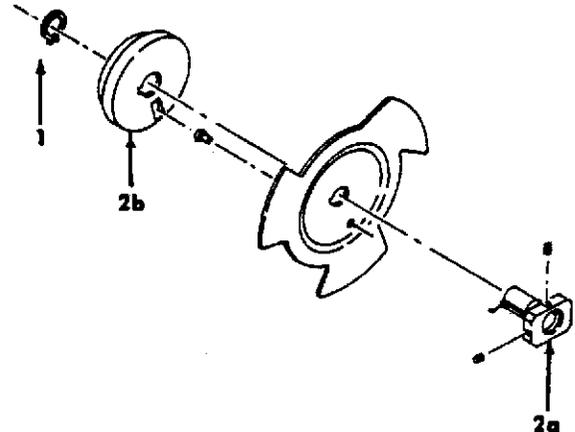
SHUTTER AND CAM ASSEMBLY
